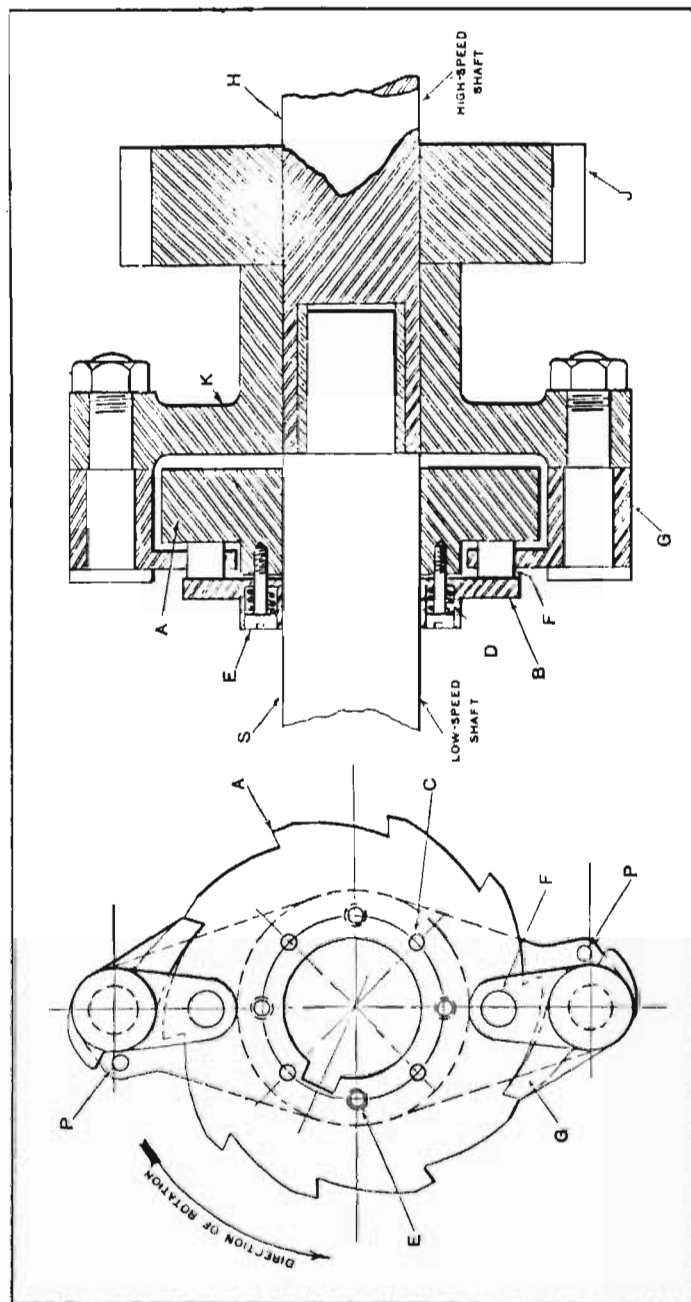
Over-run Clutch which Permits Speed of Driven Shaft to be Accelerated without Affecting Speed of Driving Shaft
